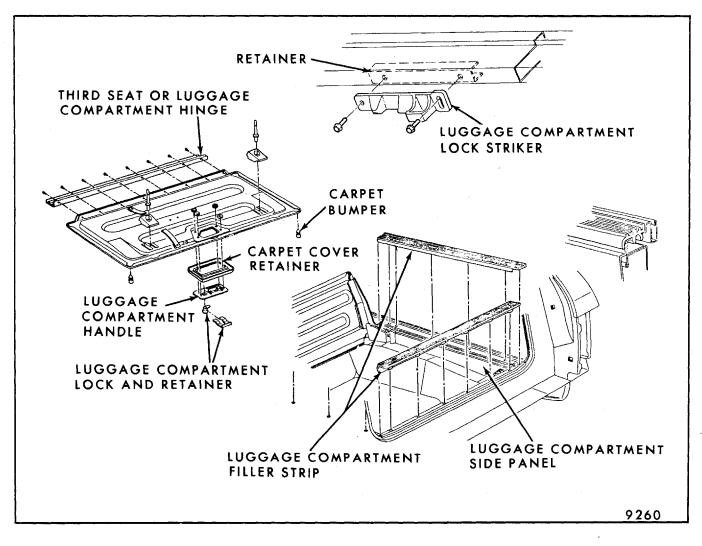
Luggage Compartment and Lock Installation - B Station Wagon Styles
